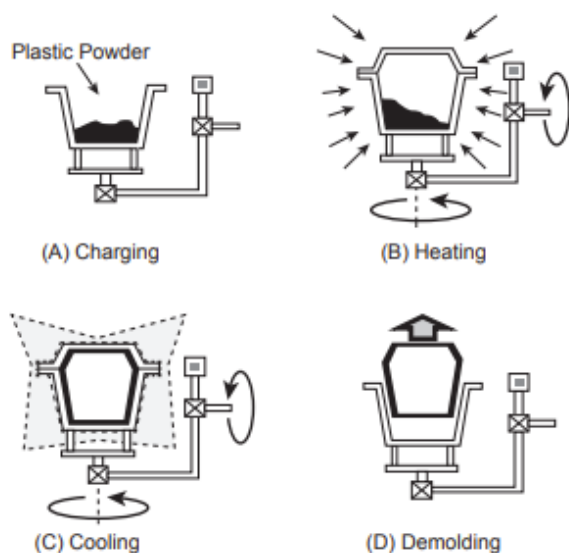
Biaxial rotational molding sample process diagram (Ebnesajjad & Khaladkar 2017)
